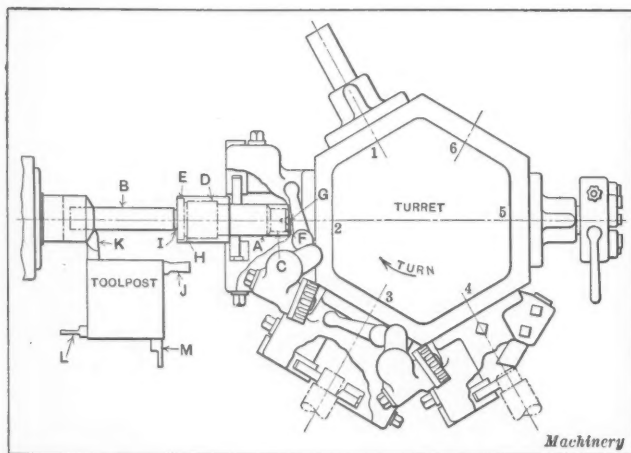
Tooling Equipment used in producing Work illustrated in Fig. 17
